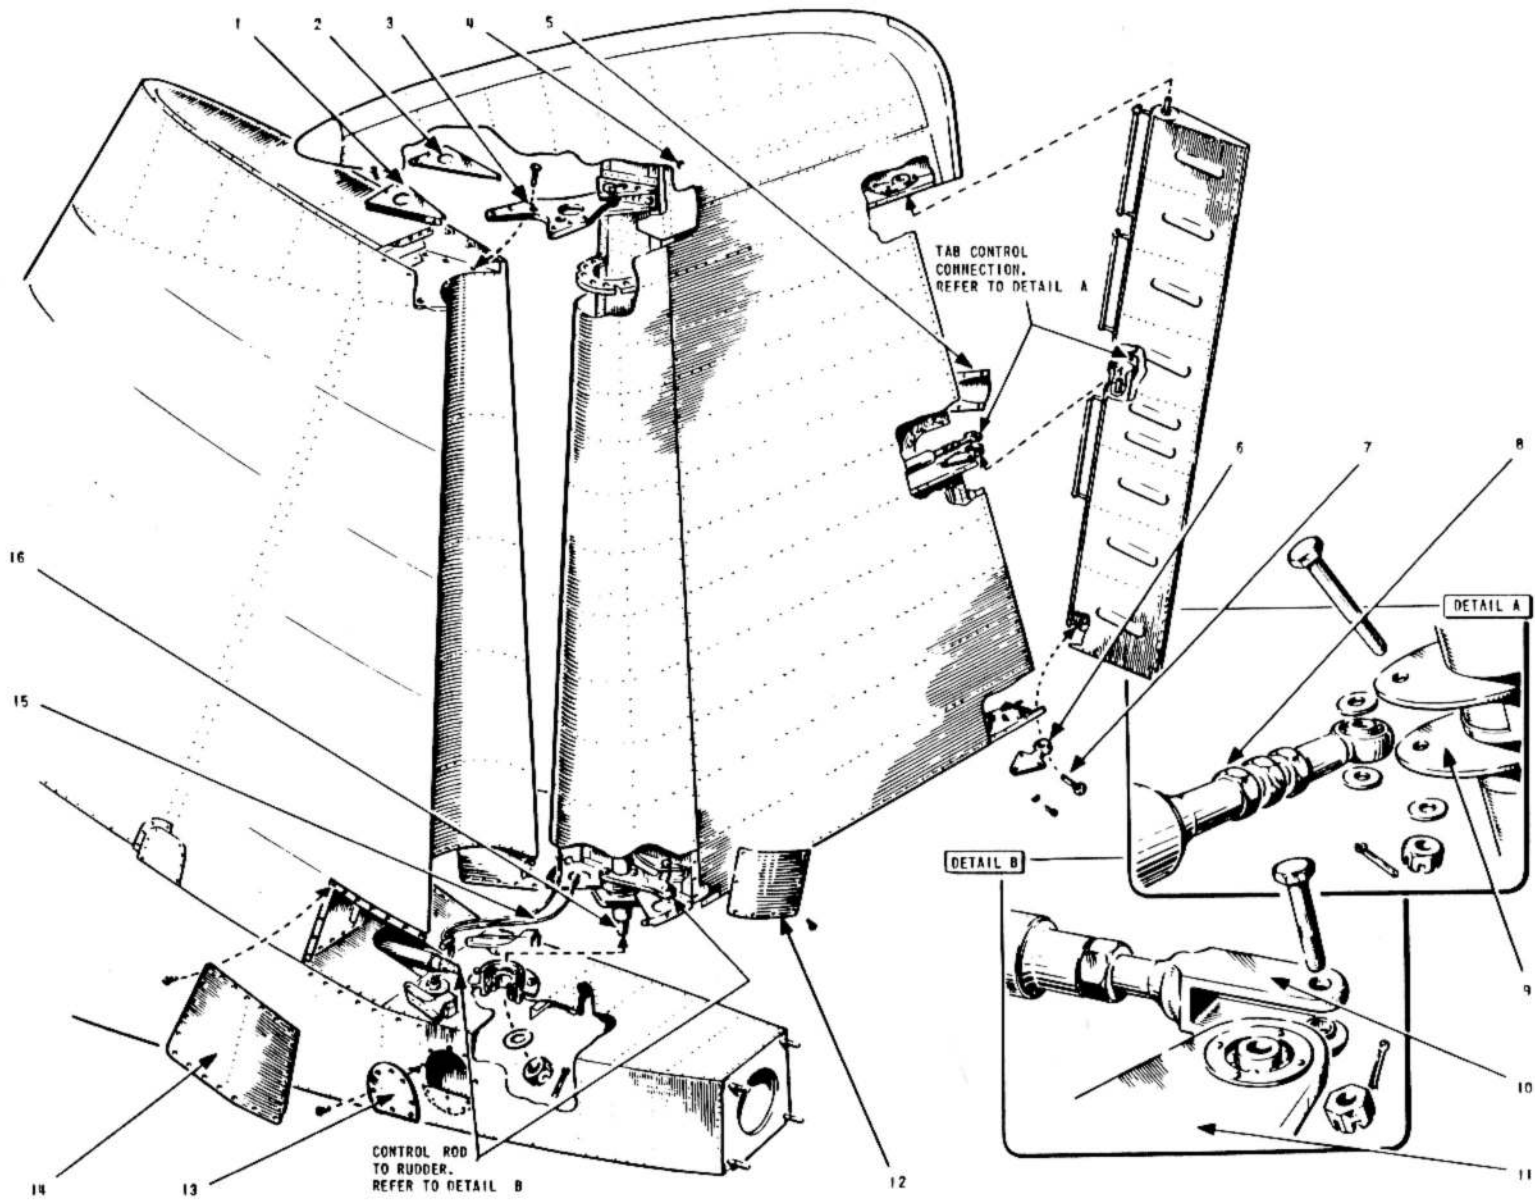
RUDDER AND RUDDER TAB REMOVAL
